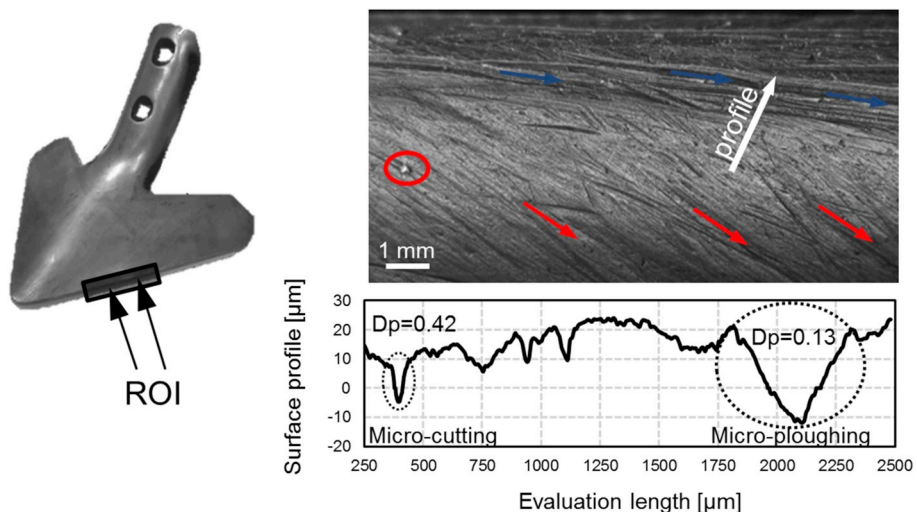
Macroscopy of tine cutting side surface and  $D_p$  extraction.
